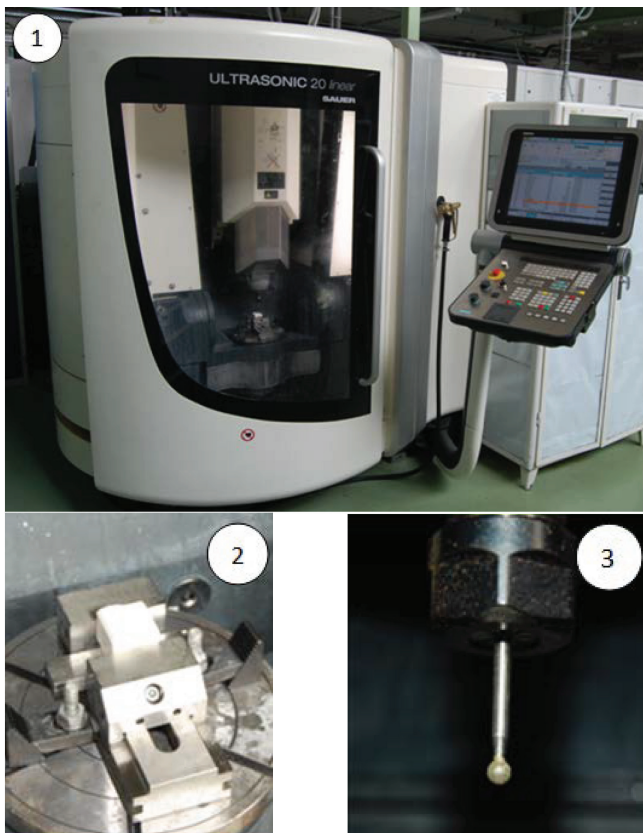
Test stand: 1 – machine tool, 2 – working space with attached specimen, 3 – Dremel 7105 grinding wheel
